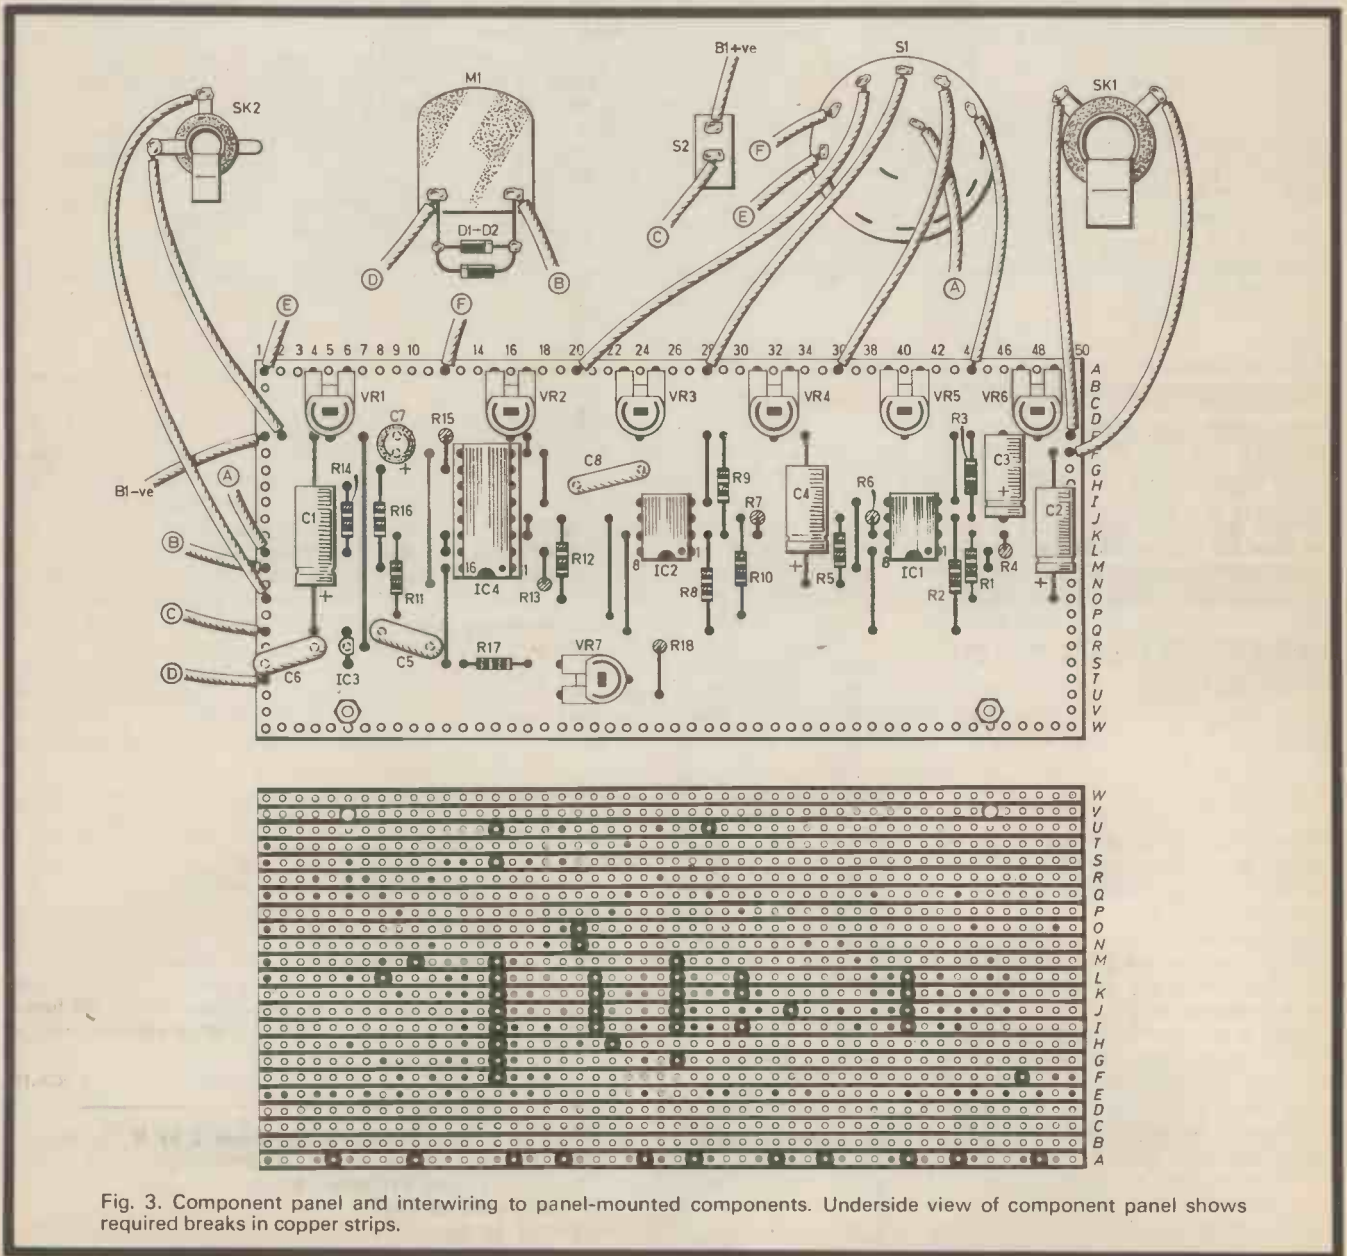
Component panel and interwiring to panel-mounted components. Underside view of component panel shows required breaks in copper strips.
